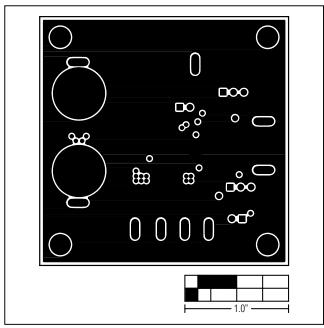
MAX16922 EV Kit PCB Layout—Solder Side
